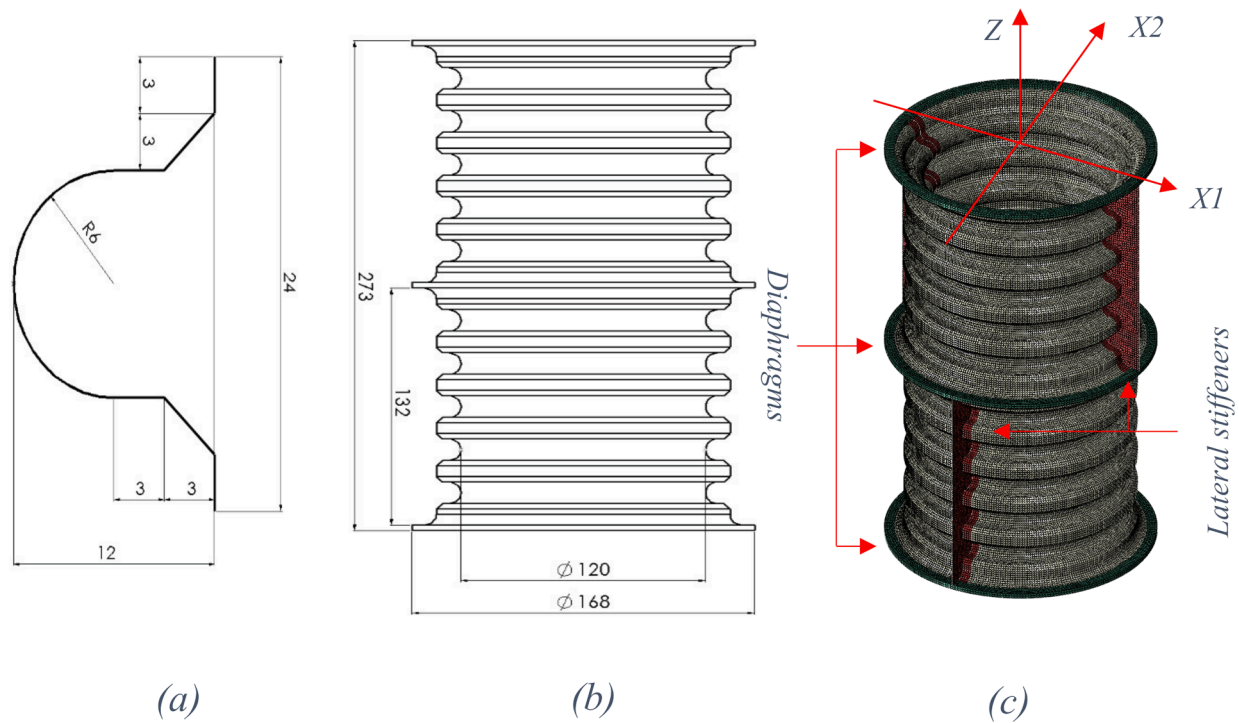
(a) Shape and dimension of the corrugation scheme; (b) Dimension and shape of the whole tube; (c) FE model of complete joint based on corrugated laminate.
